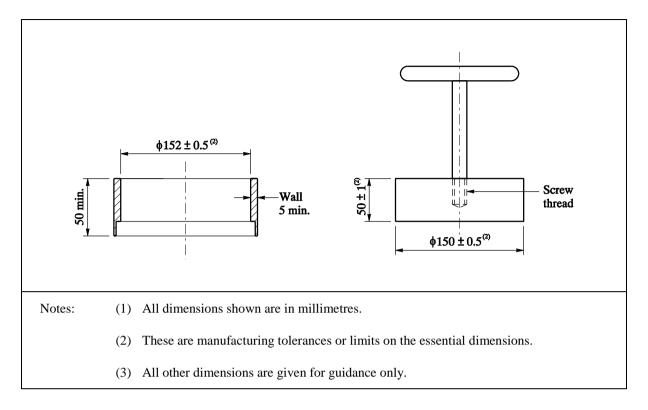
Plug and Collar Extension for Use with Cylindrical Mould for the Determination of California Bearing Ratio
